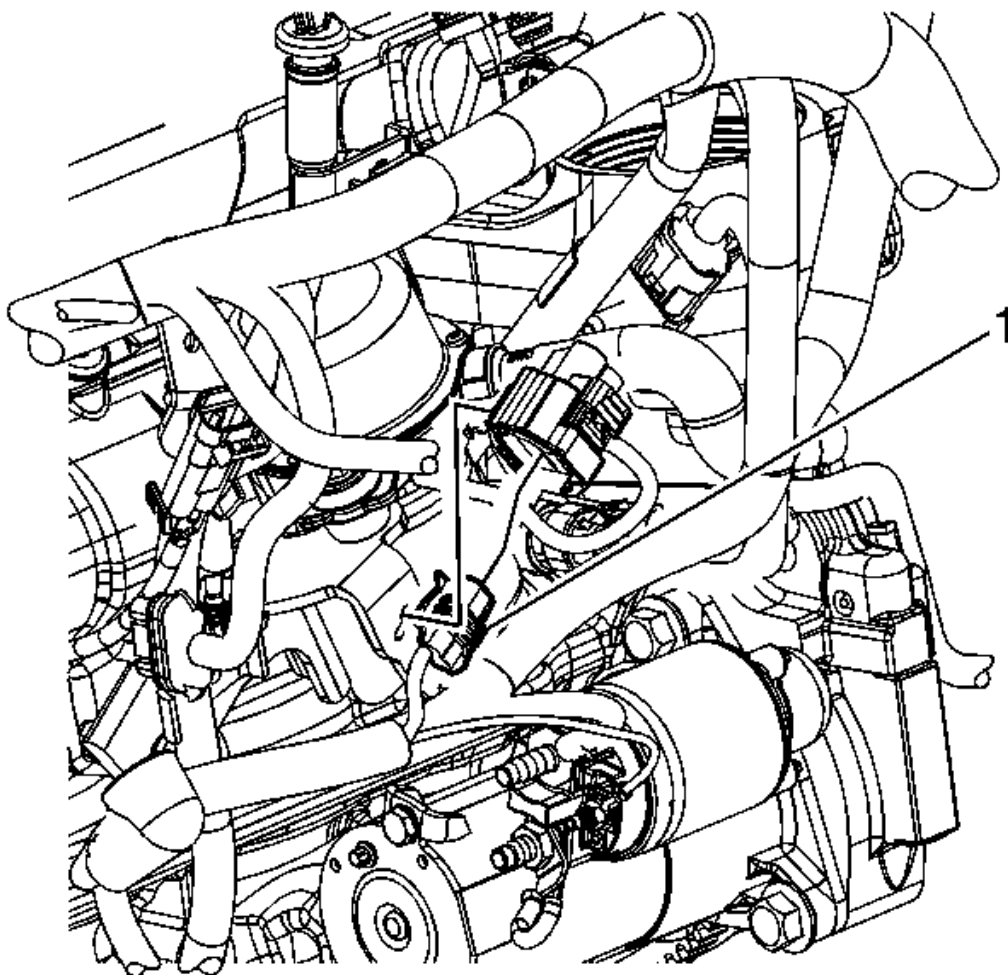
Identifying Brake Booster Auxiliary Pump Connector
